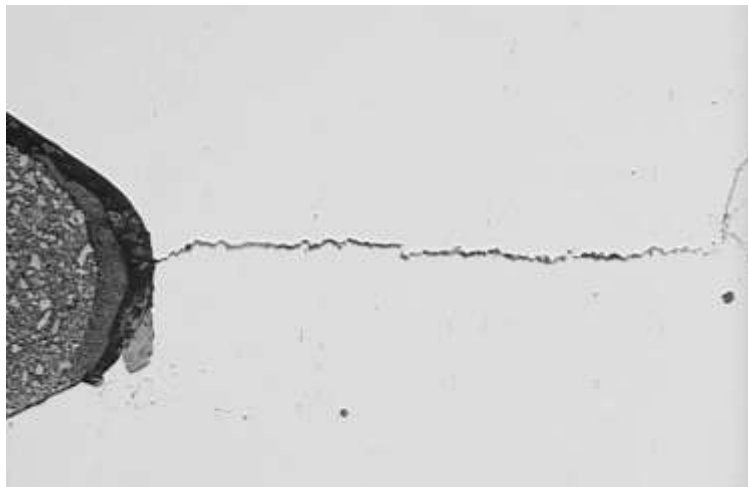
CRACK INITIATION AT THE THREAD ROOT (INTACT OTHER END OF THE FRACTURED FASTENER – BSEE RCA)
